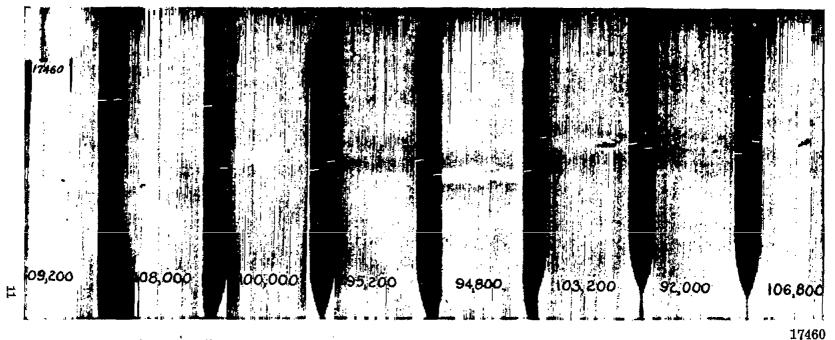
Radiograph of metal-arc-welded static tension specimens in 1/2-inch SAE 4130 sheet.
